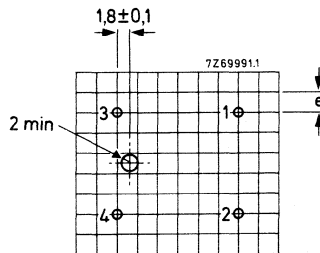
Hole pattern for mounting on a printed-wiring board (component side). Hole diameter  $1,3 \pm 0,1$  mm.  $e = 2,54$  mm (0,1 in).
